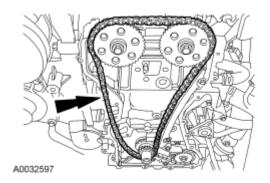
Locating Timing Chain Courtesy of FORD MOTOR CO.
